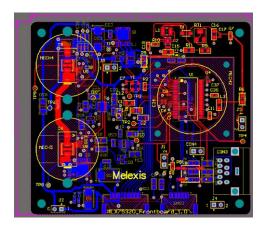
PCB layout of sensor board: Top layer in red, bottom layer in blue
